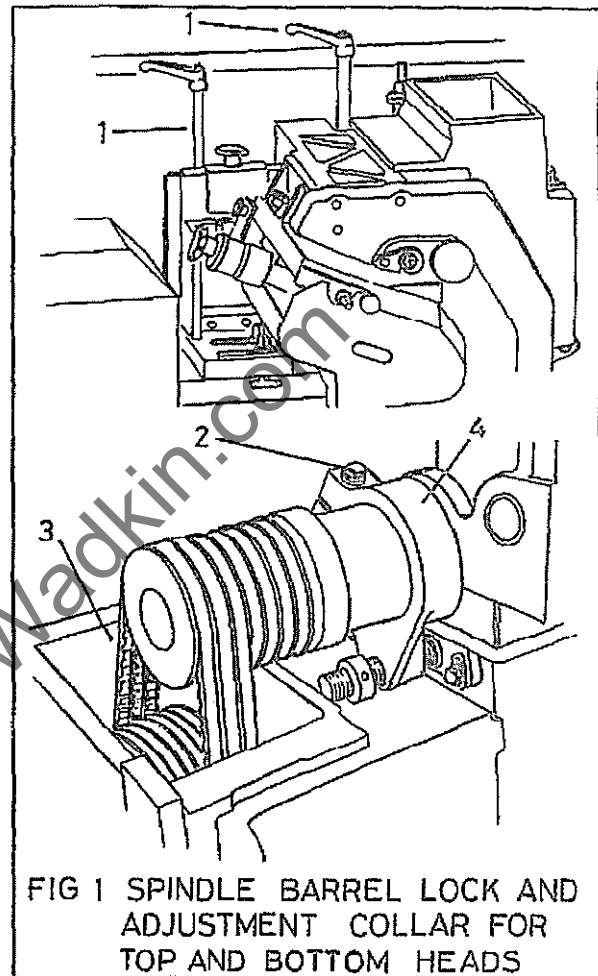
SPINDLE BARREL LOCK AND ADJUSTMENT COLLAR FOR TOP AND BOTTOM HEADS
